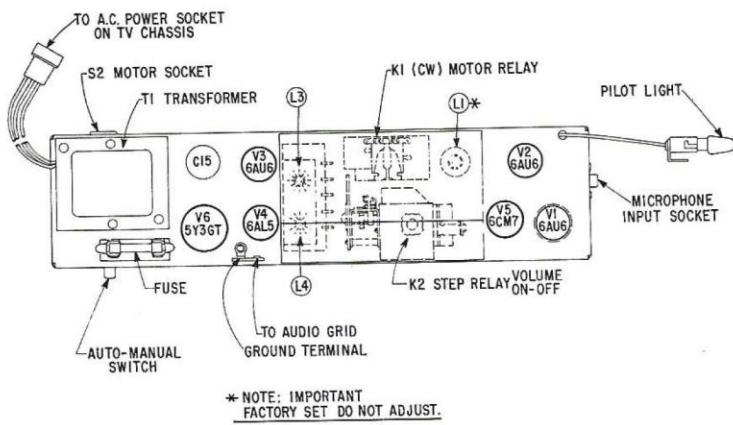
Tube and Trimmer Layout S-48583 Space Command Control Chassis
